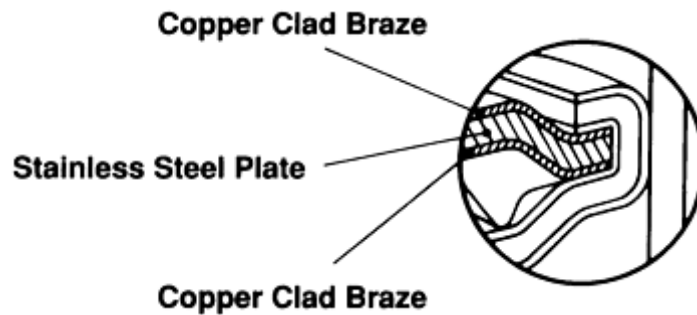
CONTOURED JOINTS THAT CAN BE MADE EASILY WITH CLAD BRAZING MATERIALS
